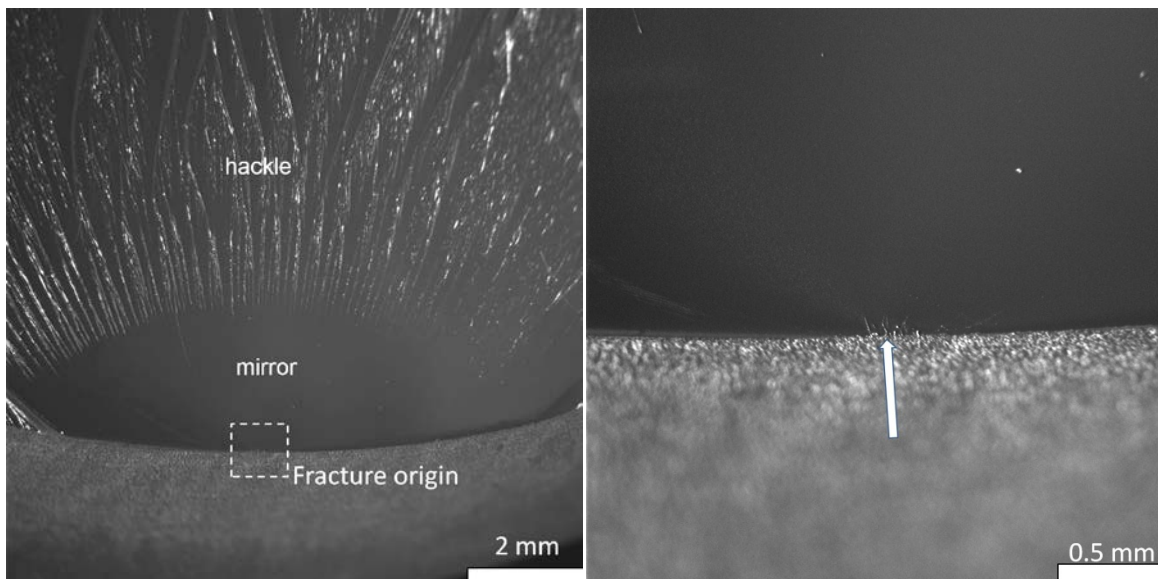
Fracture surface of sample GB3-1, a Mode I sample fractured without fatigue.
